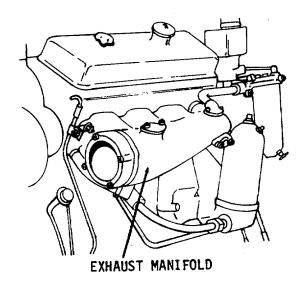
Water-Cooled Exhaust Manifold Mounting
